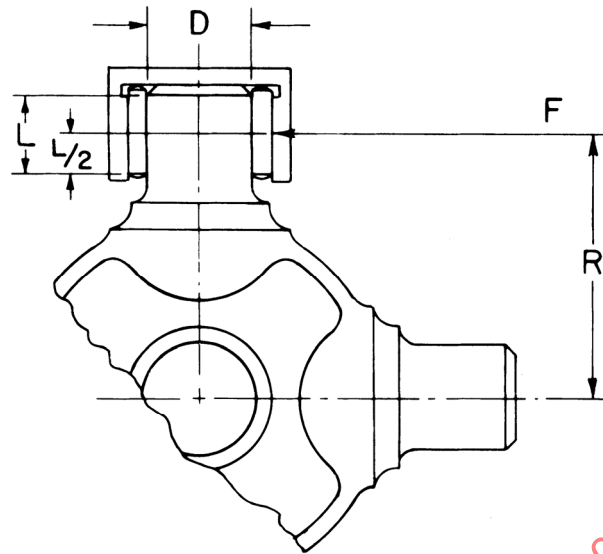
NEEDLE ROLLER BEARING AND CROSS CONFIGURATION
